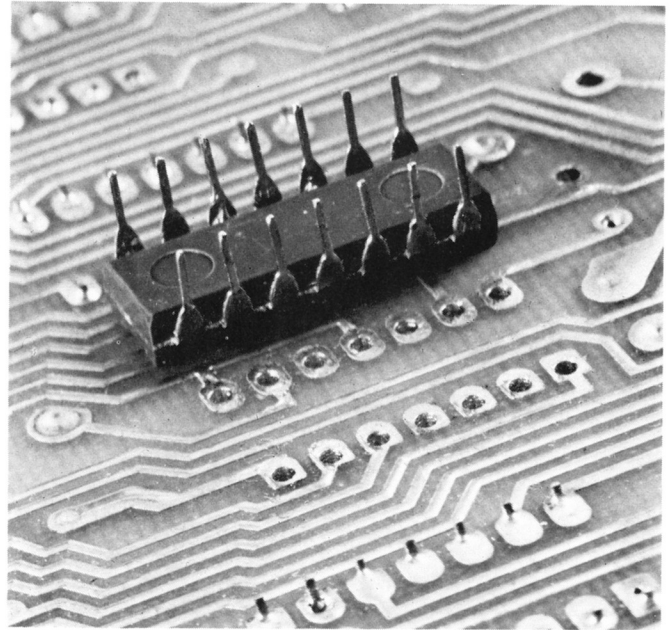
14-pin DIP completely desoldered and shown removed from circuit board. Note that holes in board are fully cleared of solder, and that all pads are clean and intact.
